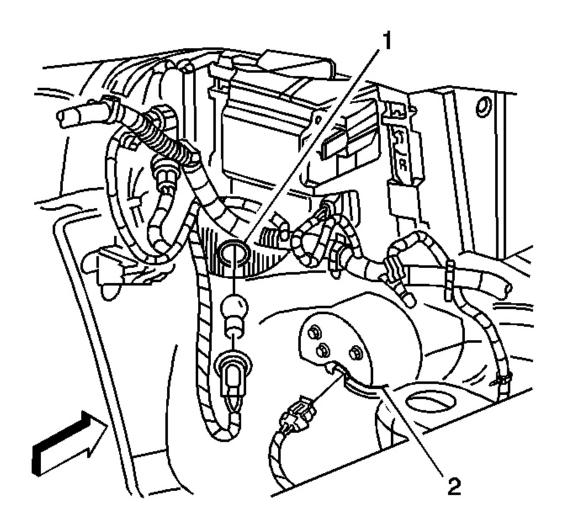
View Of Fog Lamp Housing & Socket Courtesy of GENERAL MOTORS CORP.
